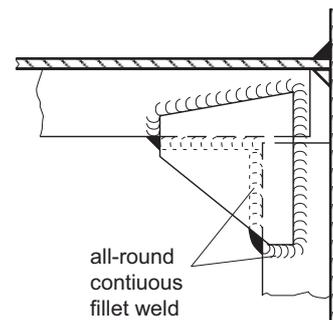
Frame-(to-bracket)to-deck beam welded joint
